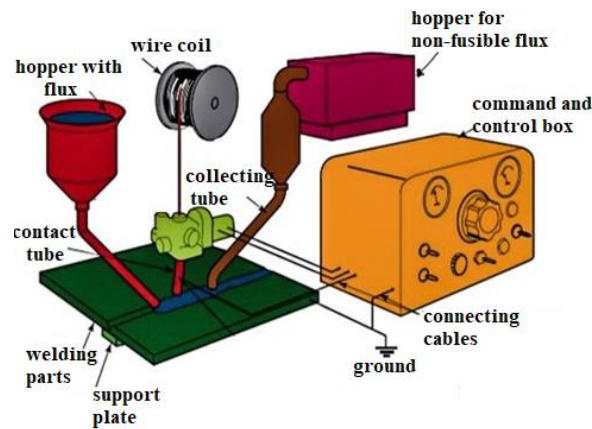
Mechanized flux cored welding plant, [3]
